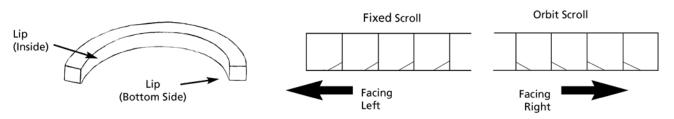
Identifying Fixed and Orbit Scroll Tip Seals.
